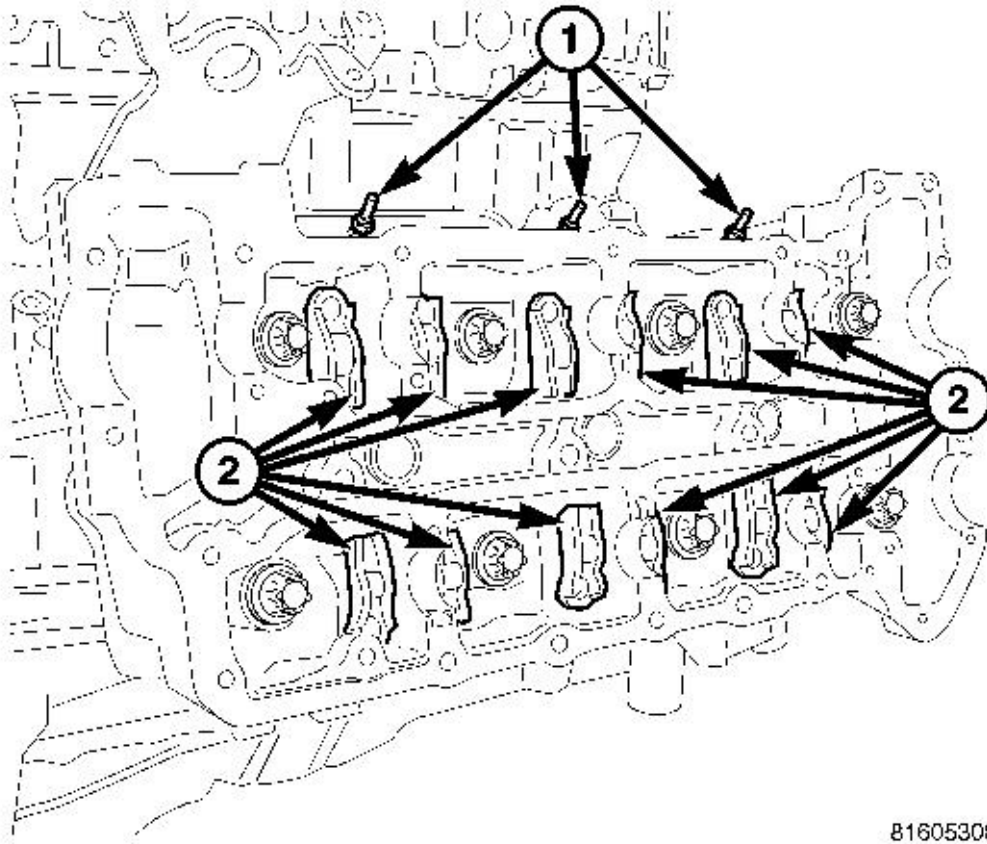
Right Tappet/Camshaft Follower Assembly & Glow Plugs
